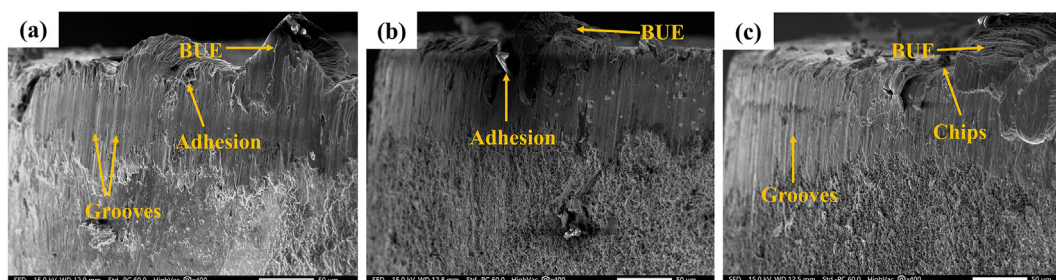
The Flank wear morphologies of inserts: (a) CH0; (b) CH1; (c) CH3.
